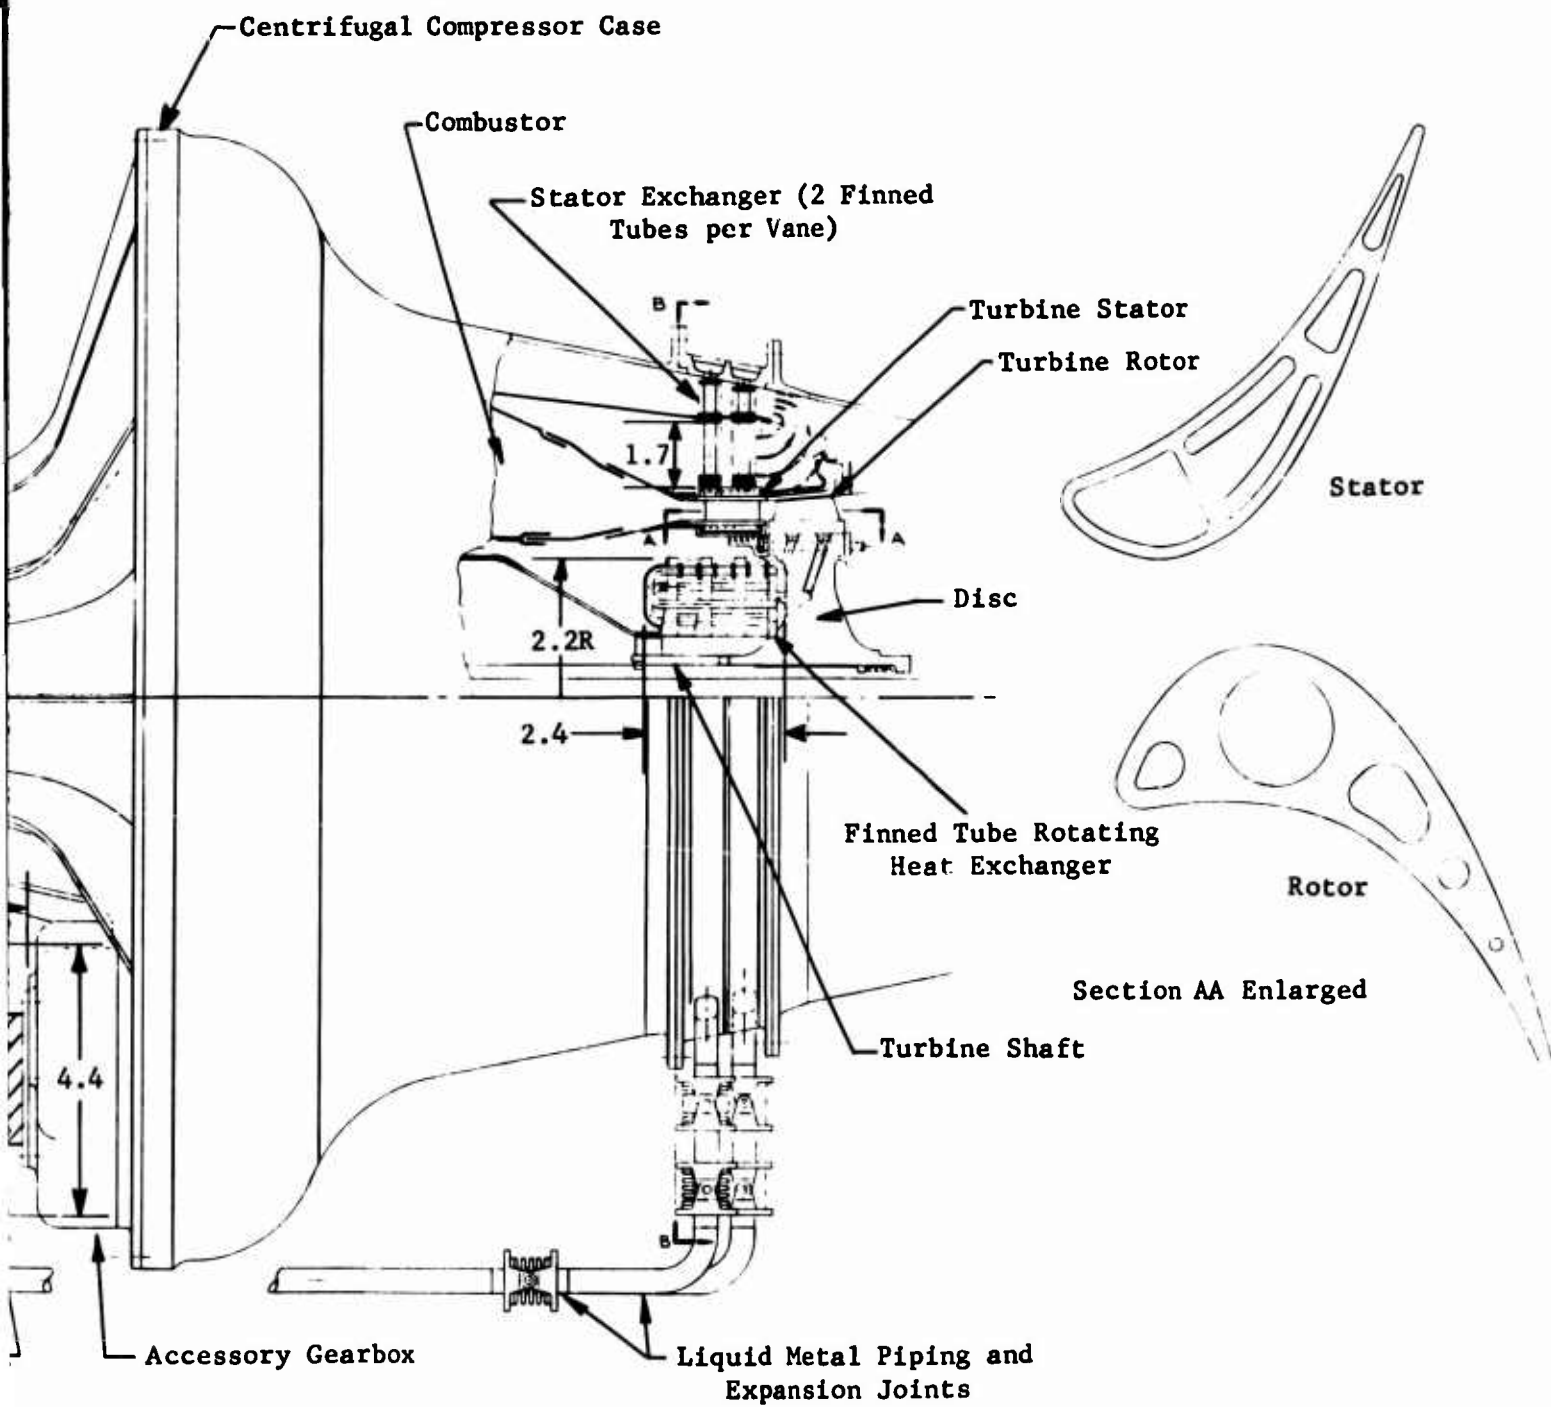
Preliminary Engine Design With Liquid-Metal-Cooled Rotor and Stator System.
